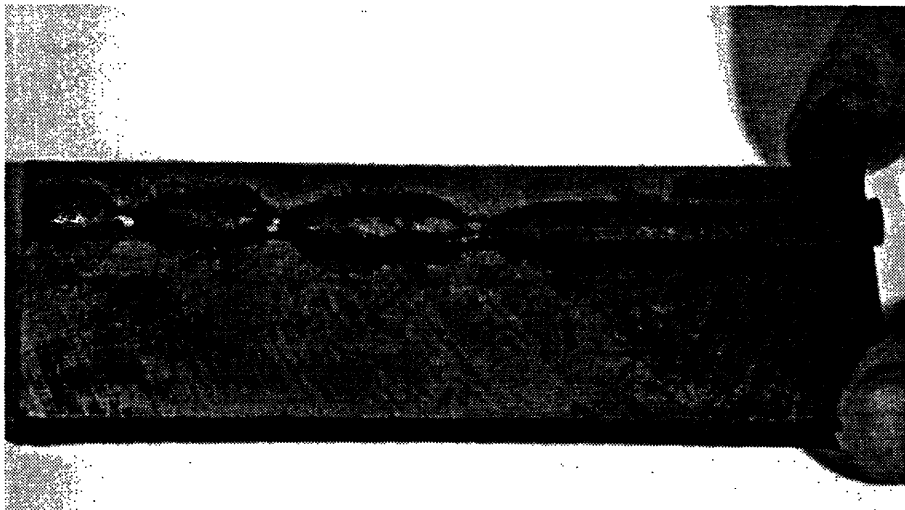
Bead Deposited on Workpiece of Cross Section Dimensions 5mm x 5.08 cm
